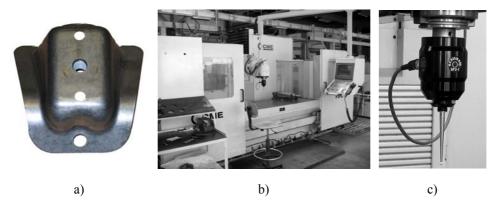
Digitalisation of the product, a) a part, b) machining station – milling FS2, c) Reinshaw head
